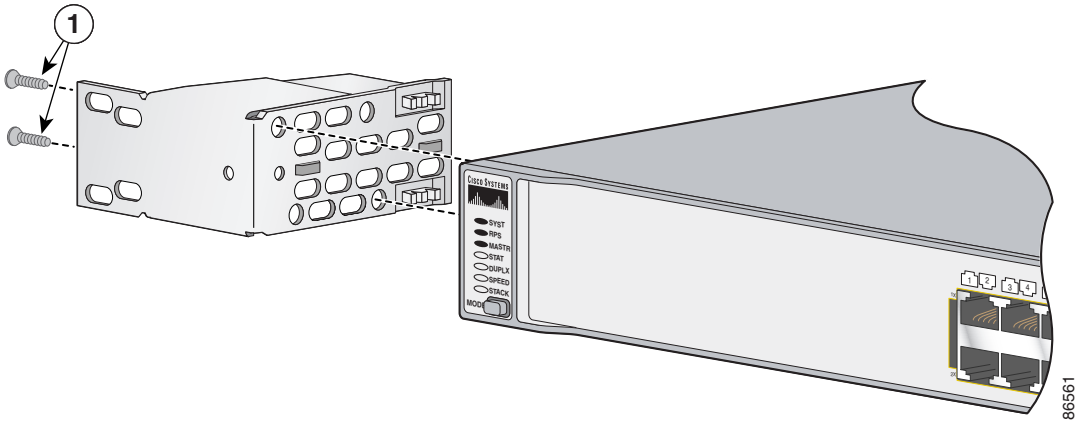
Attaching Brackets for 19-Inch Racks, Front Panel Forward
